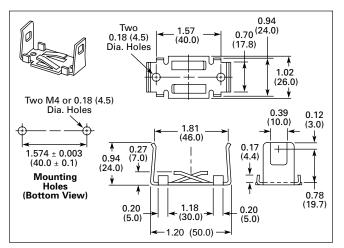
D8PA5 — Approximate Dimensions in Inches (mm)
